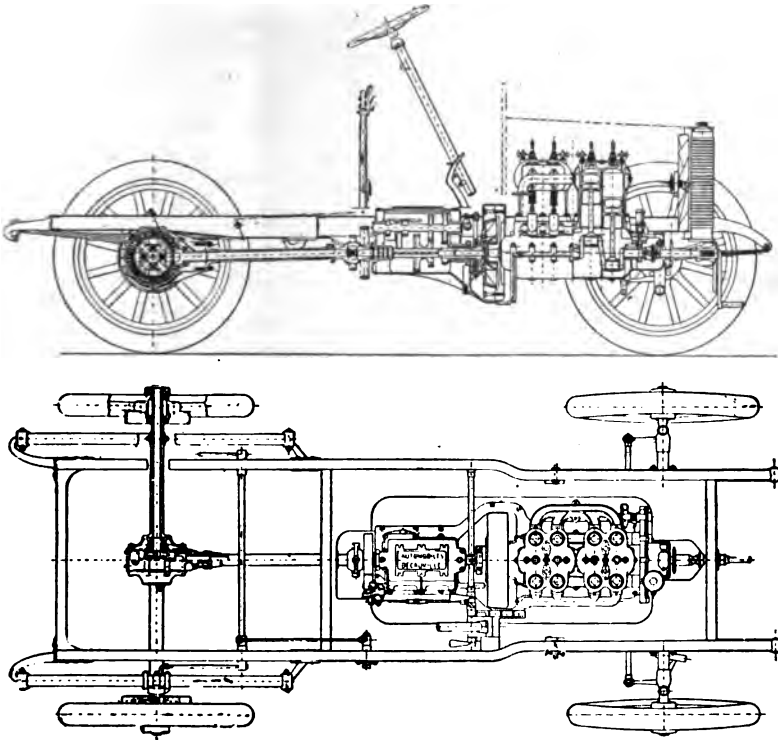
Plan View of Chassis of the Decauville Car, showing motor and transmission in the steel pan secured to the frame.
